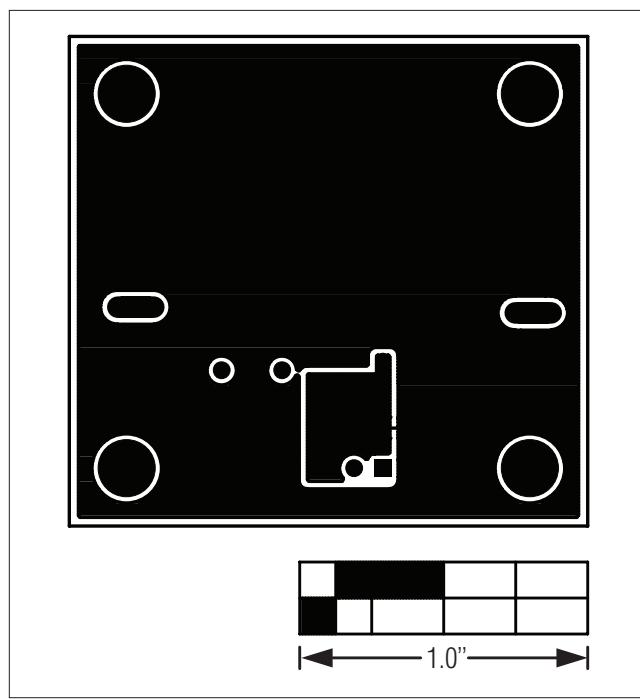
MAX15032 EV Kit PCB Layout—Solder Side
